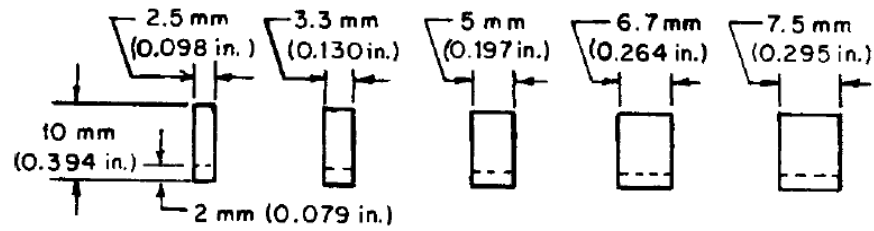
Dimension of standard sub-size Charpy specimens.
